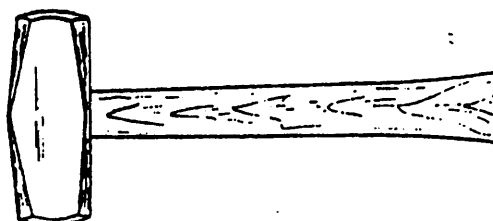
Type XI, class 1, styles A and B, stoneworkers', hand drilling, long and short pattern.
